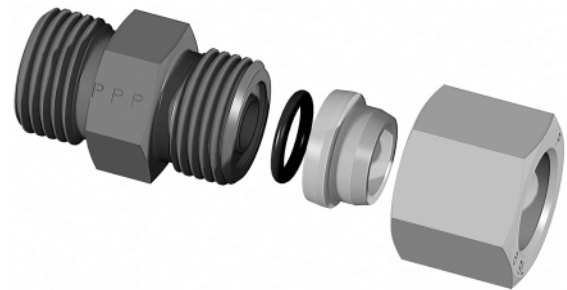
Seal-Lok Fitting Body, O-ring, Sleeve and Nut
